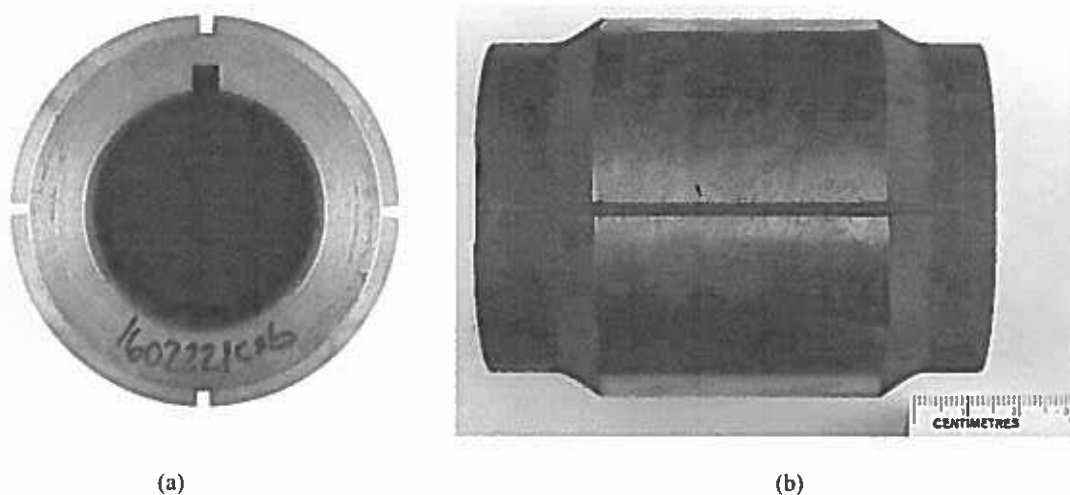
Al-NdFeB thick coating sprayed on the (a) outside and (b) inside surface of a 17 cm diameter cylinder.
